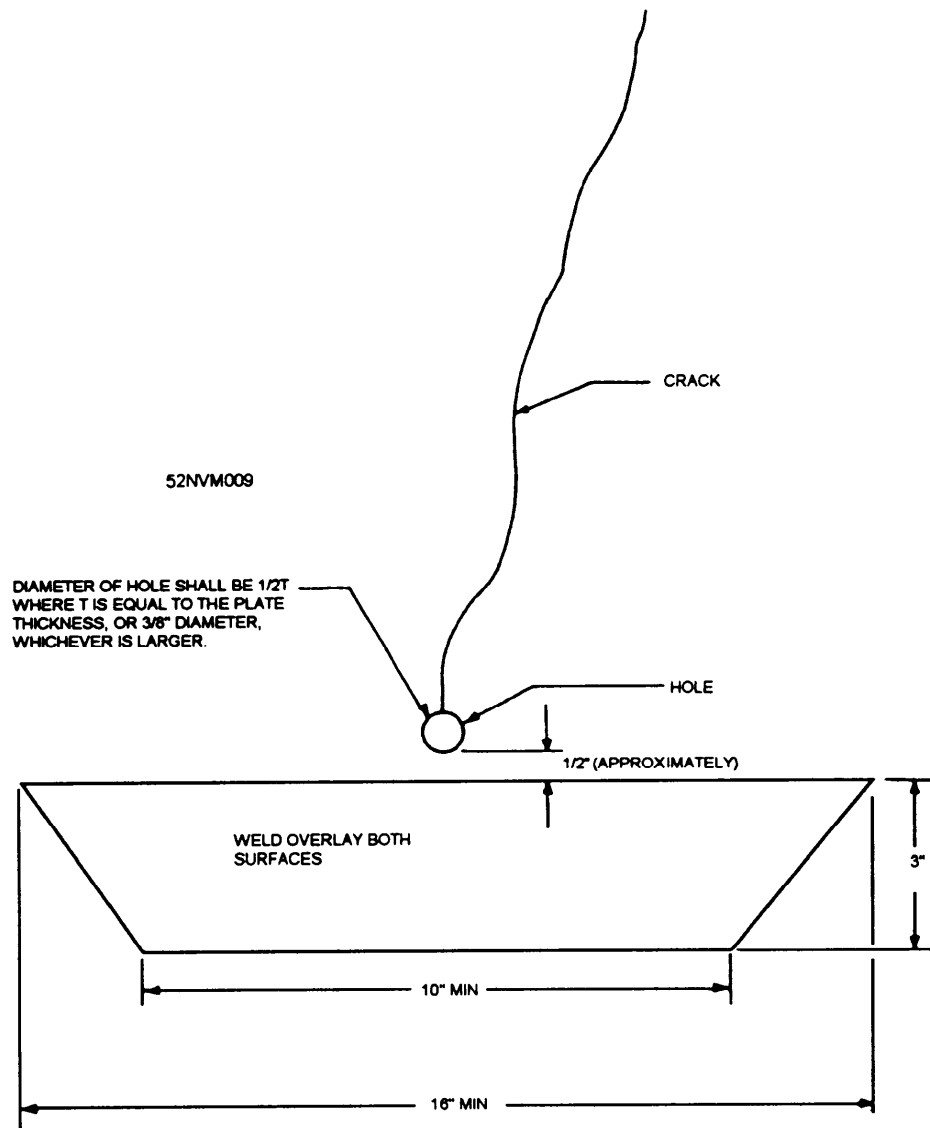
Ductile metal overlay to arrest cracks in surface ship hull structure.
